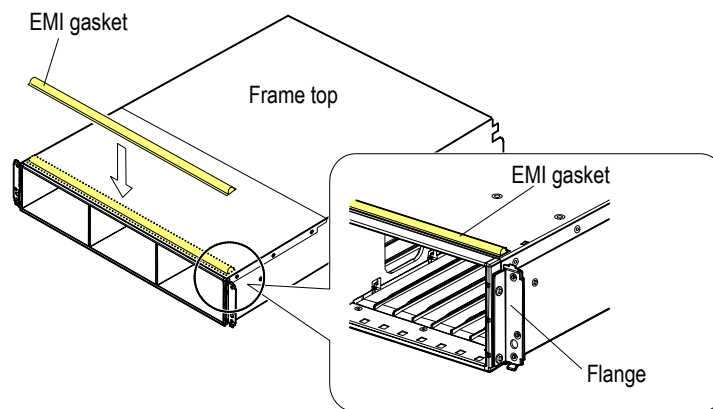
Position for Sticking EMI Gasket (CBXSL/CBXSS/CBSL/CBSS)
